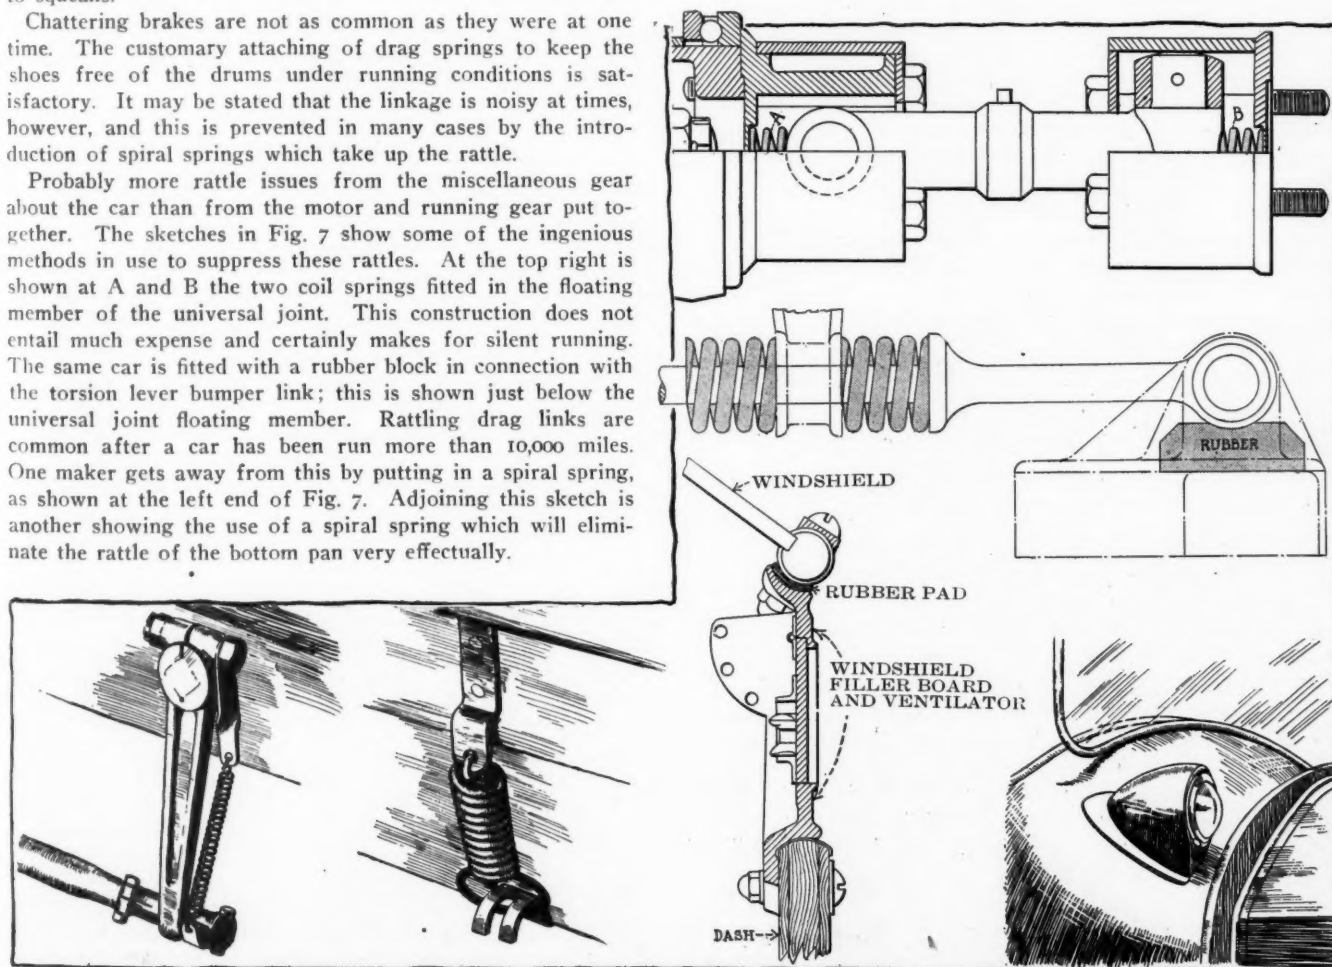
Top, springs A and B in floating member of universal joint, torsion bumper rod. Bottom, left to right, spring fitted to drag link, spring bottom pan holder, padded windshield connection, non-rattling lamp
